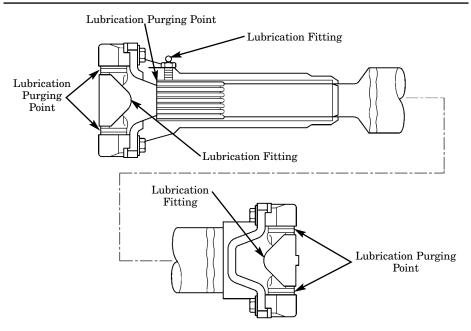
Driveshaft Universals, Slipyoke, and Splines. (Notes 2 and 7)
